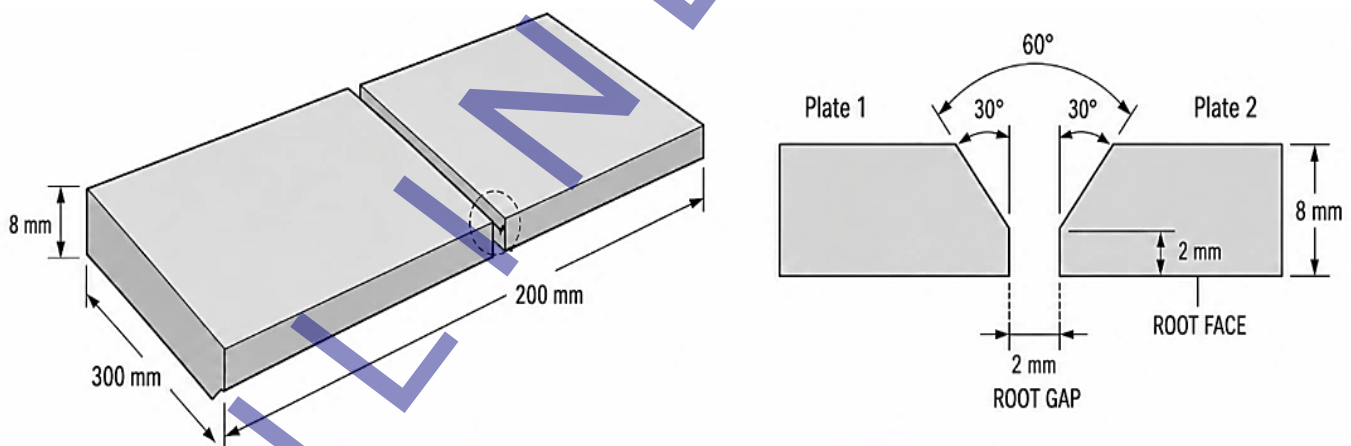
Dimensions of the SS400 plate specimen and geometry of the single-V-groove butt joint (all dimensions in mm)
